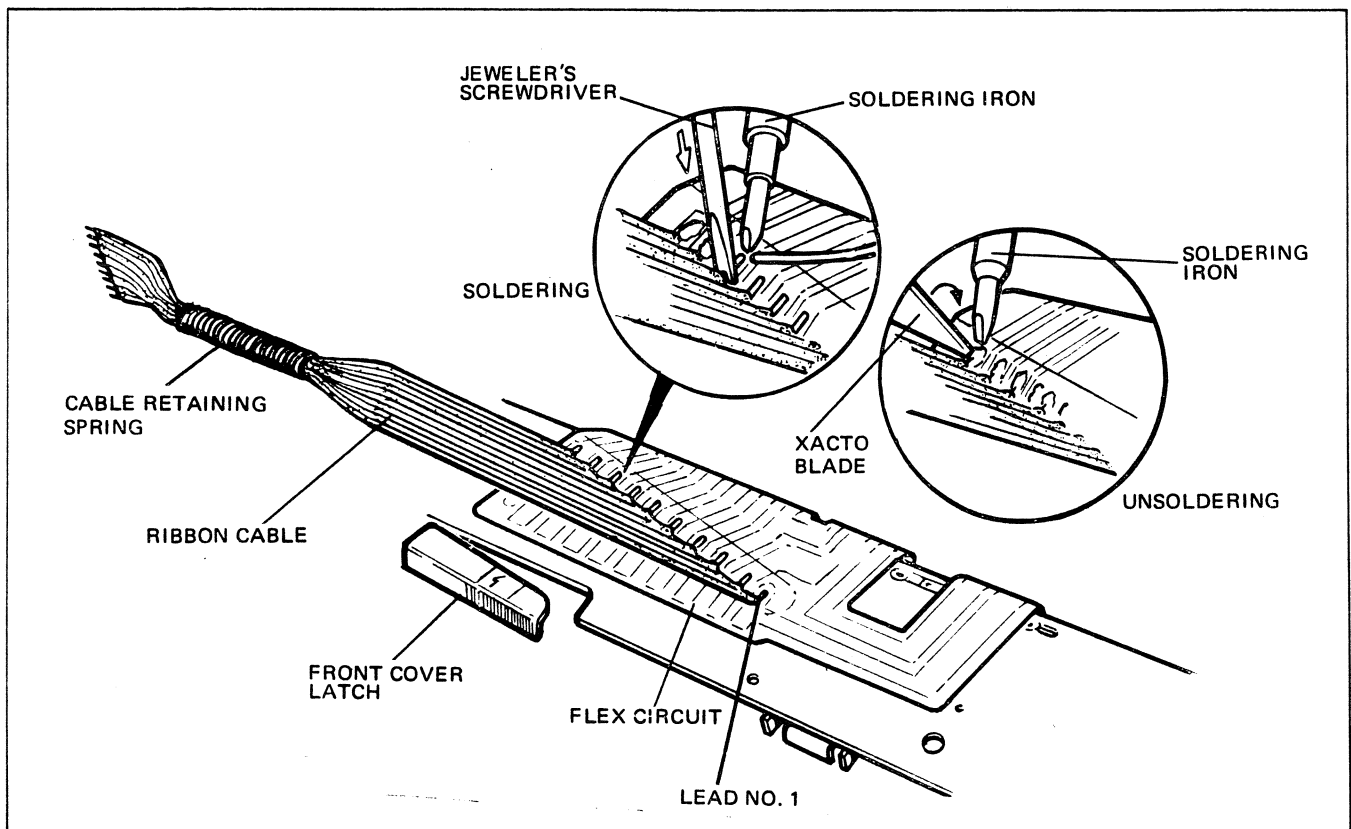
SOLDERING/UNSOLDERING RIBBON CABLE
